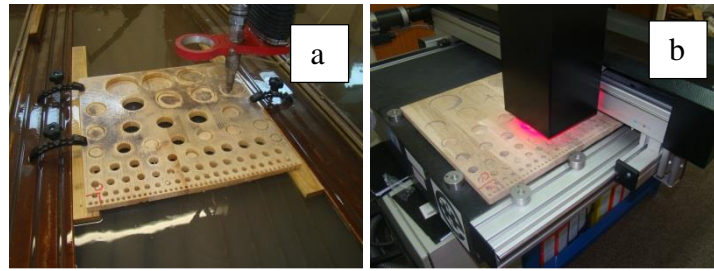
Abrasive waterjet cutting method with Maxiem 1530 equipment (a) OPTODesq equipment used to measure the flatness of the panels (b)
